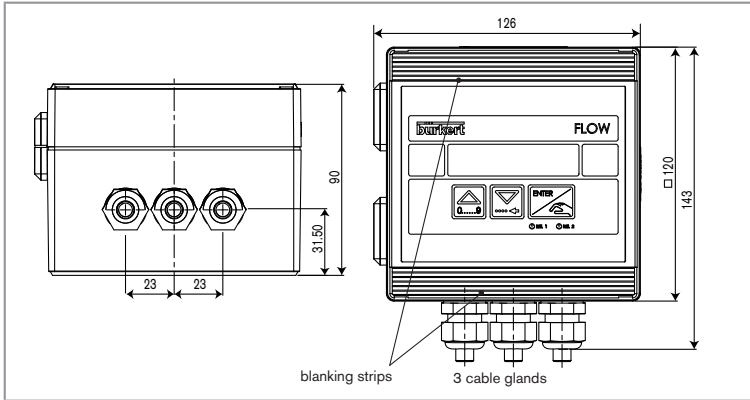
Dimensions of the transmitter, wall-mounted version
